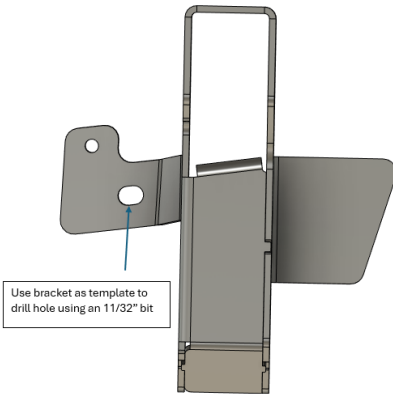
& FIG 8 - Drill hole in frame using Bracket as a template
